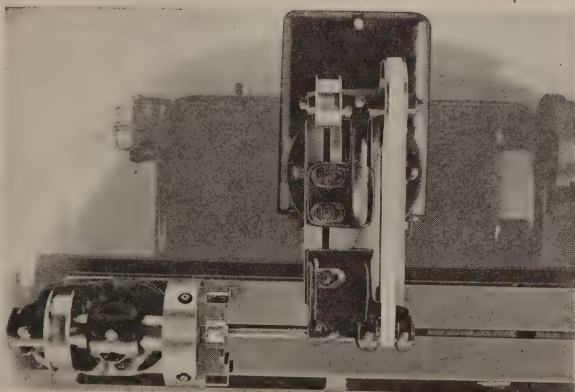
Internal grinding attachment in use in No. 1 universal grinding machine (Brown & Sharpe). The wheel stand is removed, the wheel-stand platen is reversed (swiveled 180 deg.), and the countershaft bracket and grinding fixture bolted to the platen as shown. The countershaft and fixture spindle are connected by a small open belt, and the belt from the overhead works to the countershaft is crossed to give the correct direction of rotation for the grinding wheel.
